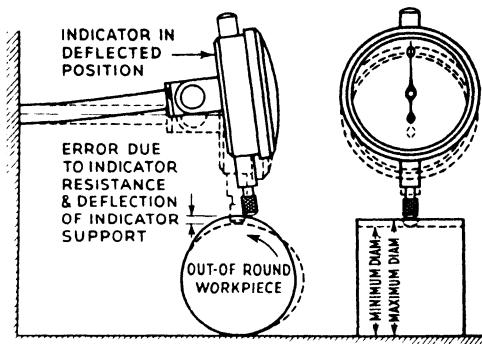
Measurement errors caused by the deflection of the indicator support arm in a test set.
